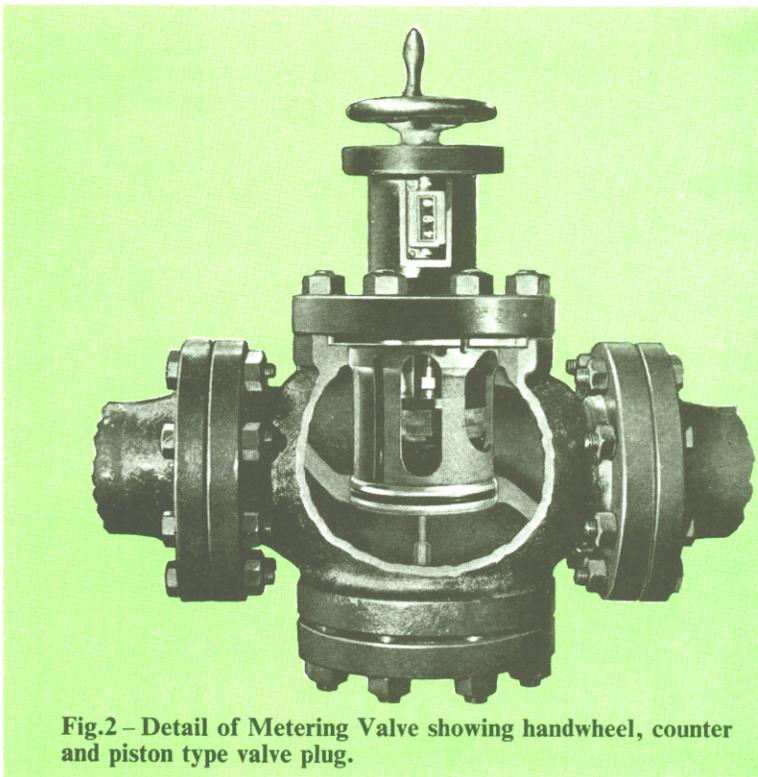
Detail of Metering Valve showing handwheel, counter and piston type valve plug.
